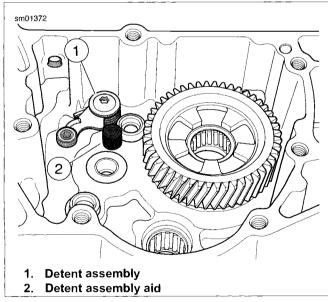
Using Gear Detent Assembly Aid (Part No. B-45520)
